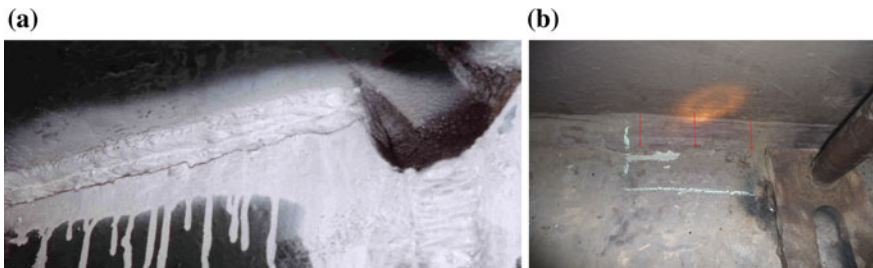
Examples of damage to the undercarriage portal frame of surface mining machines: a fracture of the reinforcing rib in the connection between the web and the *top* flange of the frame; b fracture of the vertical diaphragm in the welded joint
